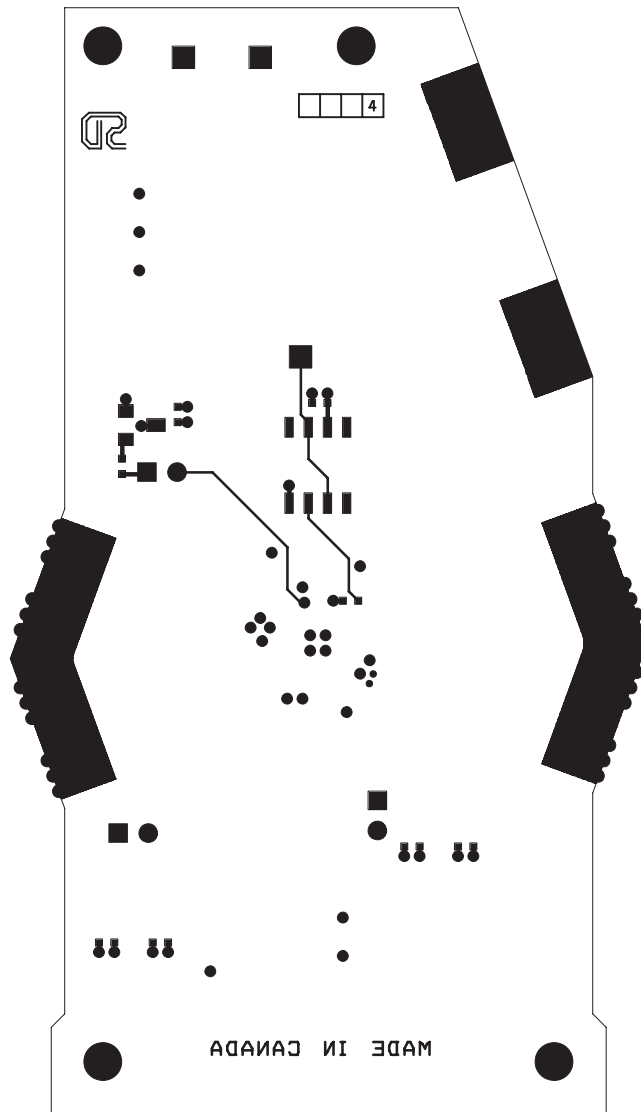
XBN2014A PCB Layout — Bottom Components
